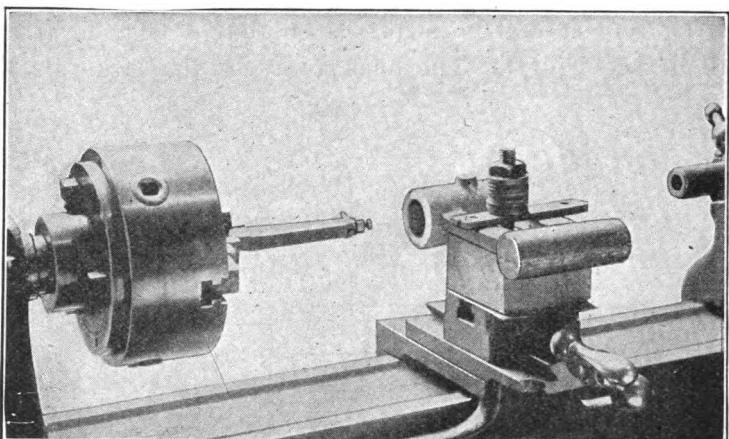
The spindle bearing arm mounted on the lathe for boring
